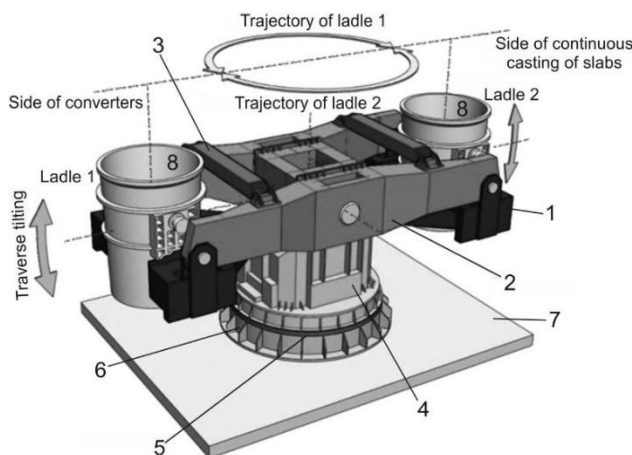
Basic parts of the casting pedestal: 1—hinging supporting baskets; 2—traverse beams; 3—connecting rods; 4—bearing support pedestals; 5—roller bed; 6—supporting structure; 7—concrete foundation; 8—casting ladles.
